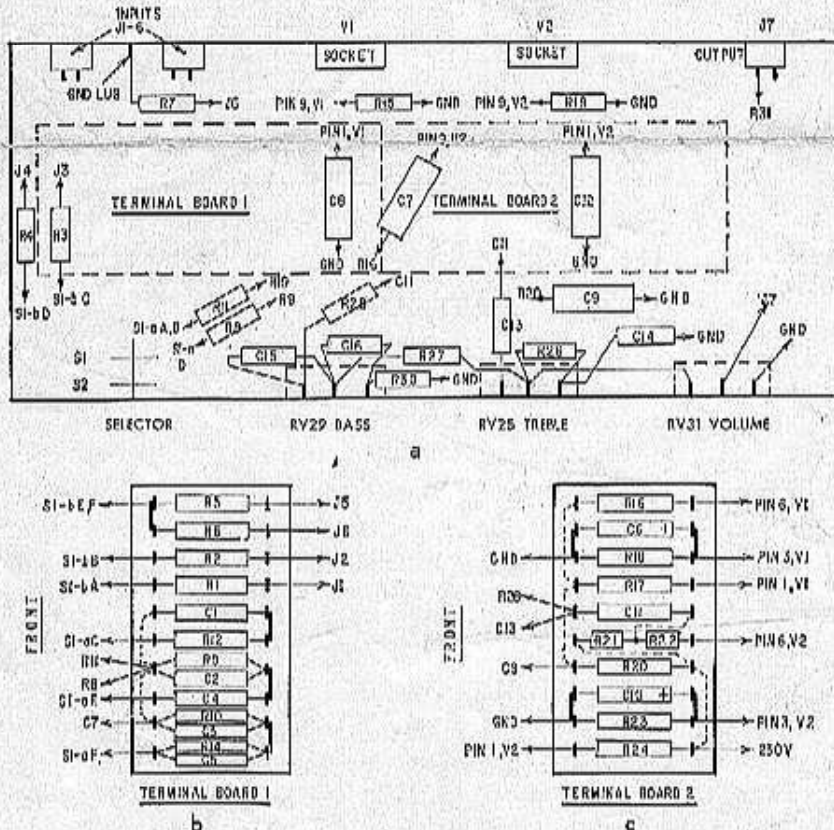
Recommended parts layout, a—the main chassis; b—terminal board 1; c—terminal board 2.
